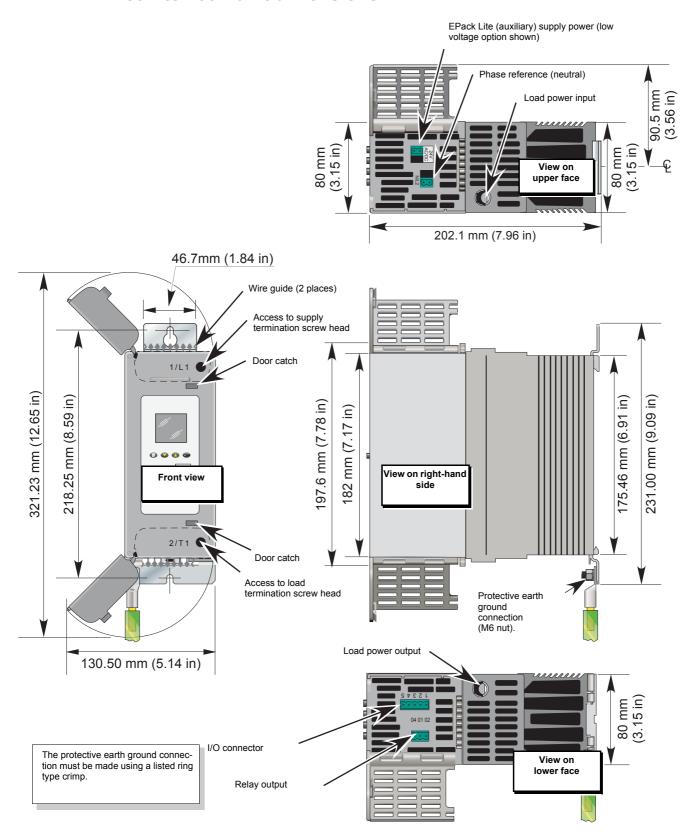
Mechanical installation details (80A to 100A units) (doors open).
